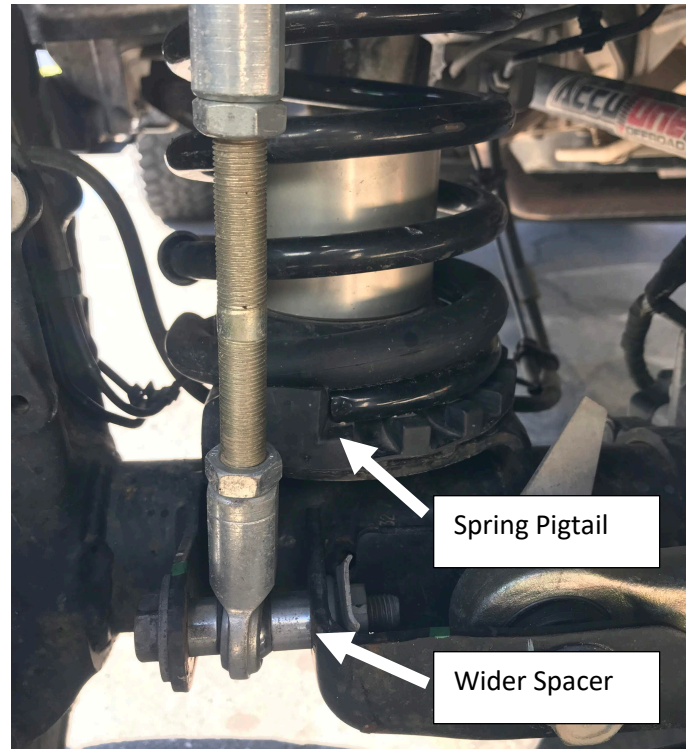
Front lower coil spring alignment, and sway bar link spacers.
